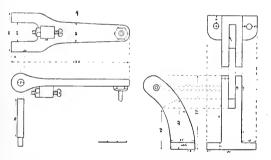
A. Swinging arm and upper bearing. B. Anterior pulley support. Measurements are in millimeters.
